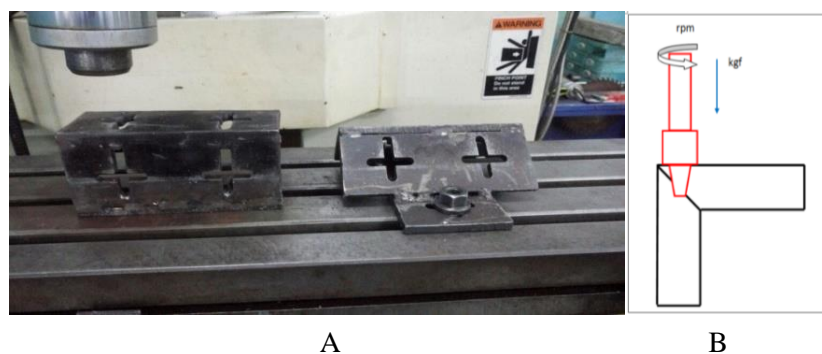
Jig design (A); Joints corner-lap joint with a 90° angle design (B)
